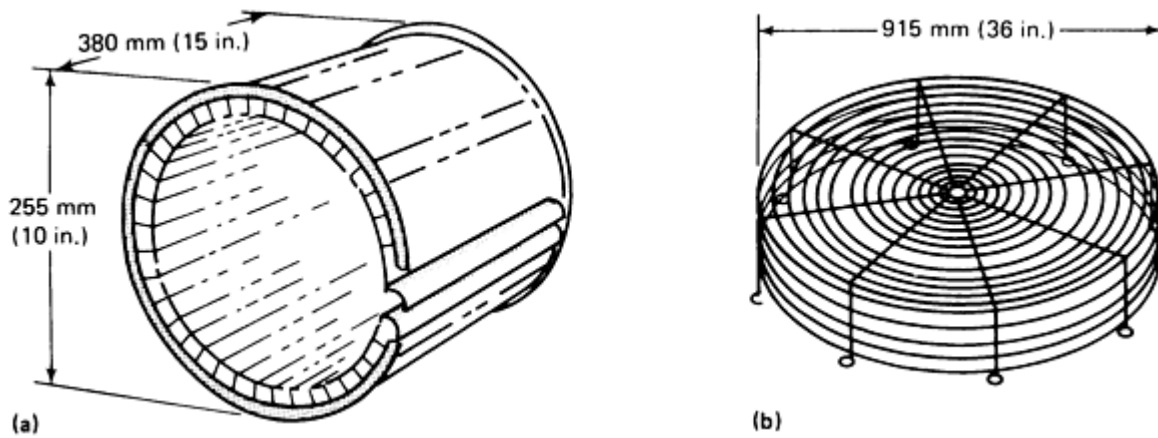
Parts that can be efficiently coated by dip painting. If considerably larger, parts like these could be painted more efficiently by the flow coating process. (a) Blower wheel. (b) Wire fan guard
